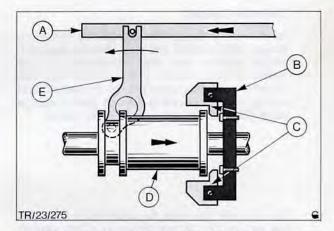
Governor Assembly at full throttle and a low engine rpm (Side elevation)
